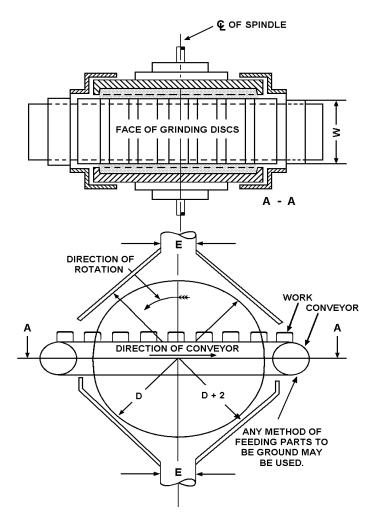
Horizontal Double-Spindle Disc Grinder Exhaust Hood and Branch Pipe Connection
